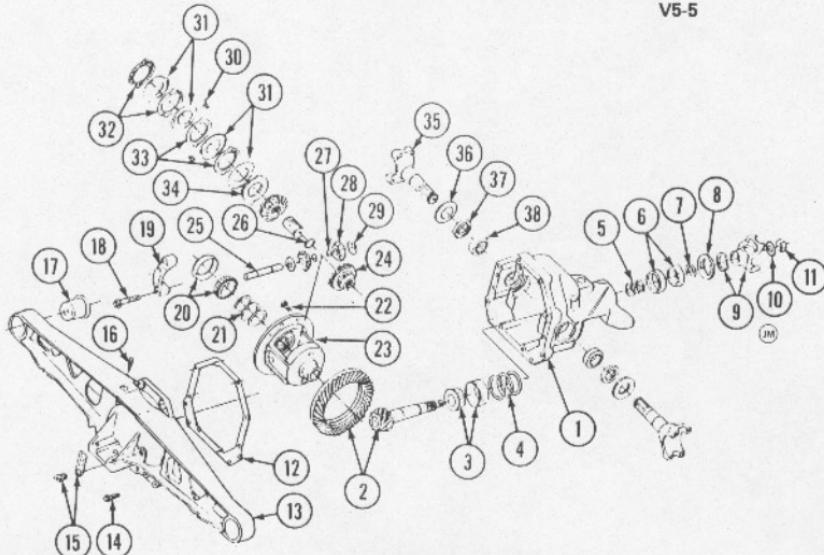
1963 - 1979 Corvette Rear Axle Carrier Assembly
